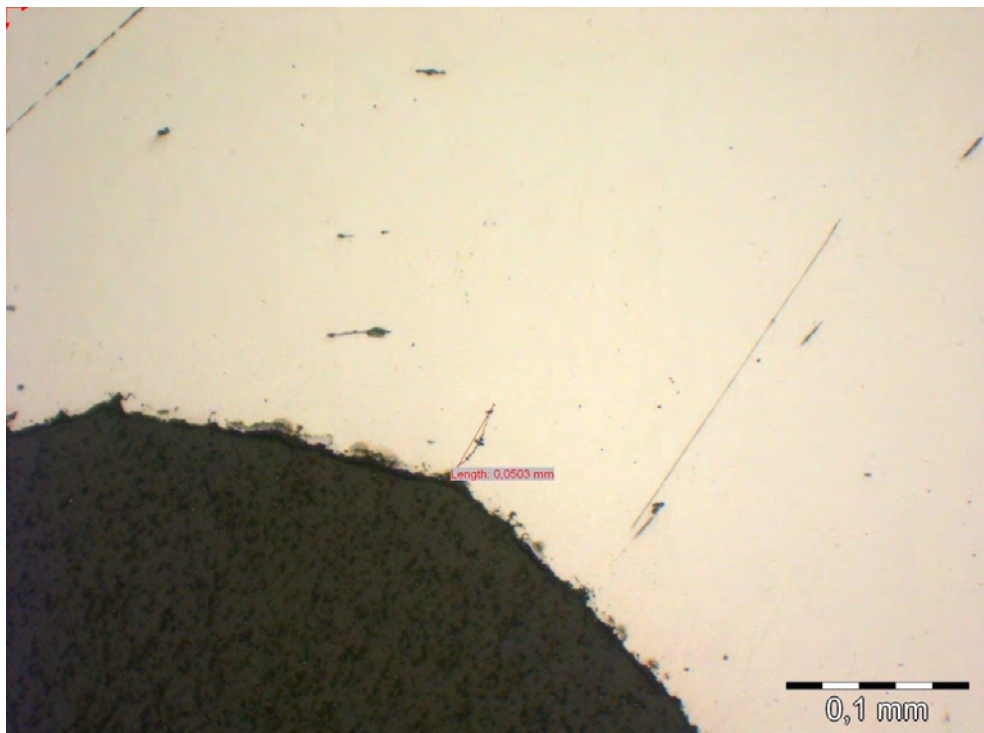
Cut five in crack at segment B, fifth ridge on barrel no. SFK 0120-A
